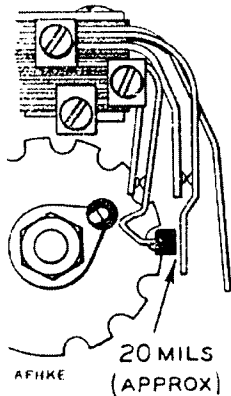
ADJUSTMENT OF SWITCHING SPRINGS
